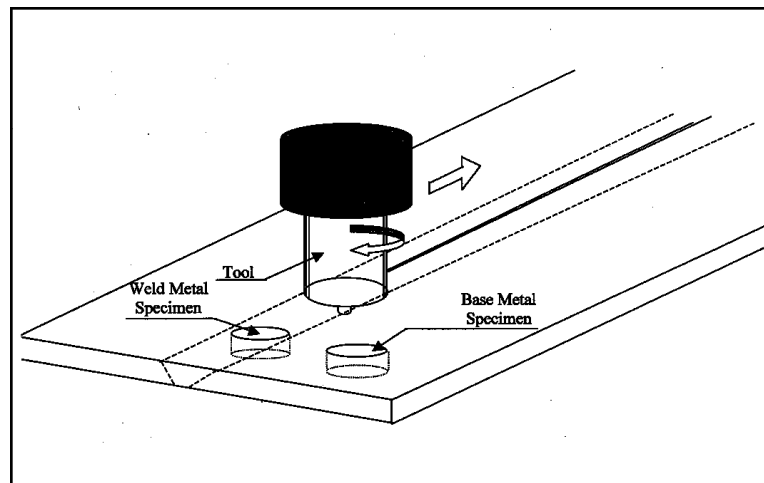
Schematic of the friction stir welding process and specimen locations.
